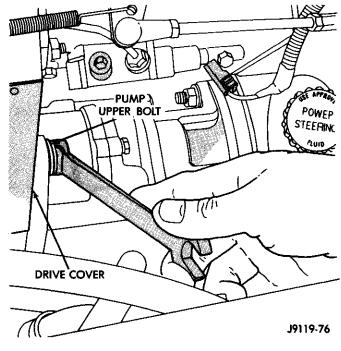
Removing Pump Assembly Upper Mounting Bolt
